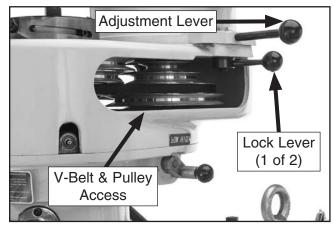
Model G0796 V-belt and pulleys exposed for setting spindle speed.
